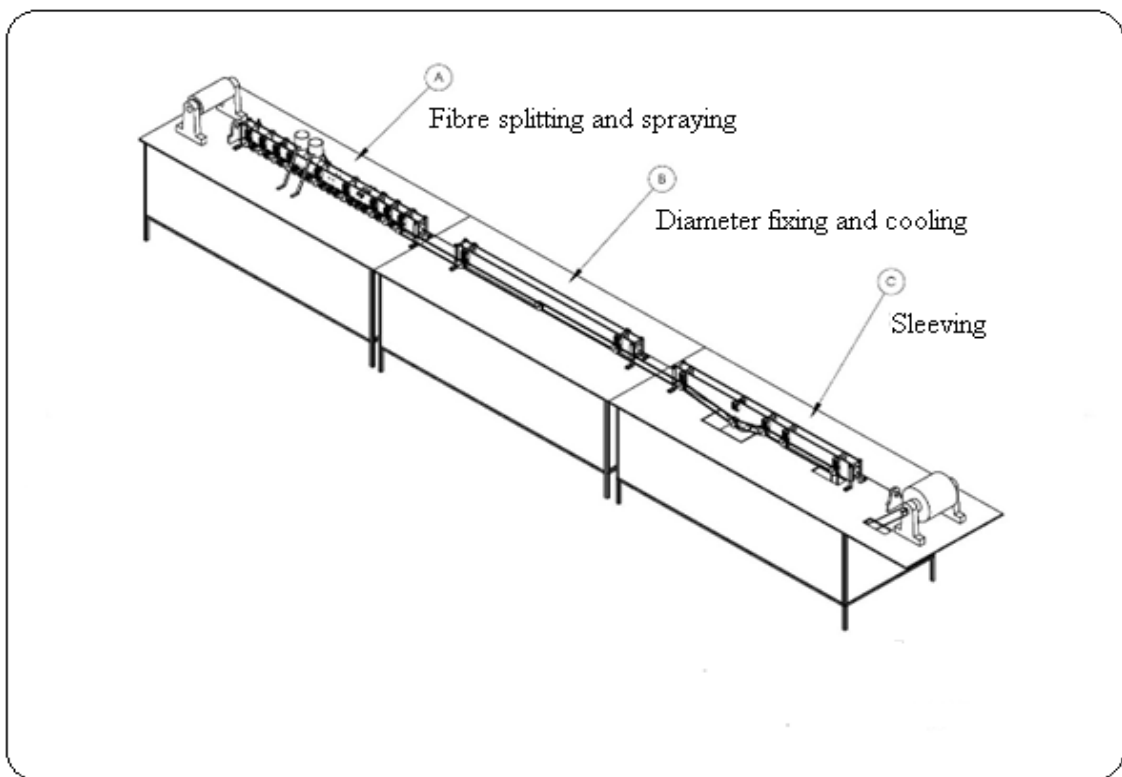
(a) Isometric view of three stages of automatic PY producing machine
